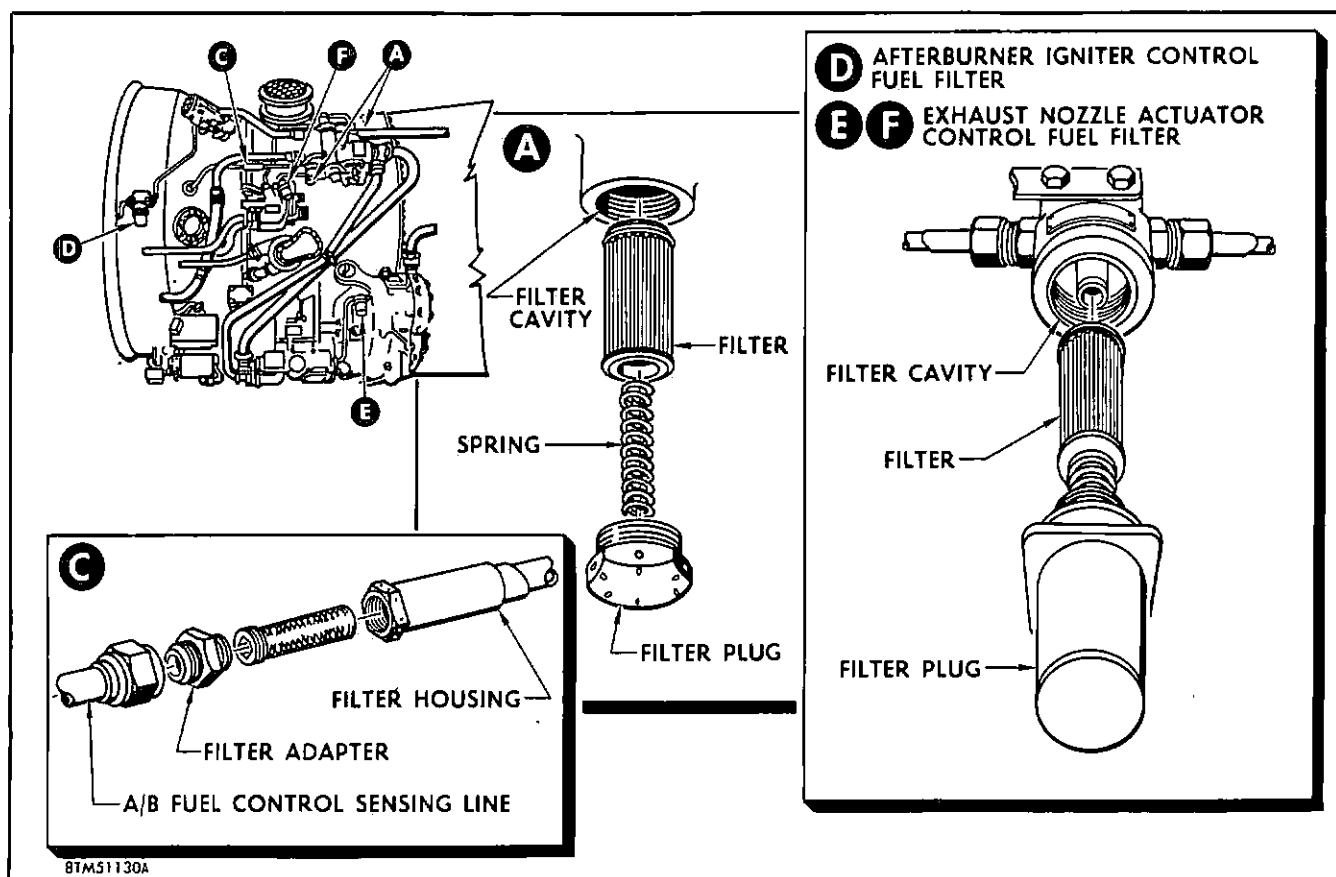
Fuel Filters in the Afterburner Fuel System
